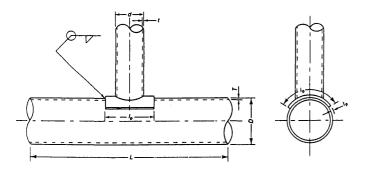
Typical T welded tubular joint reinforced with doubler plate
